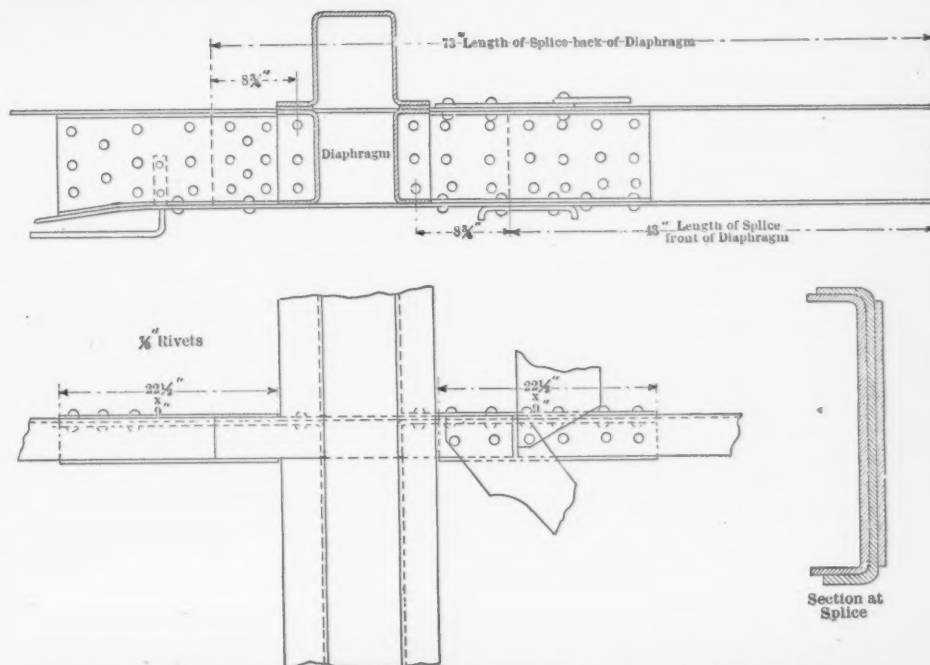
METHOD OF SPICING CENTER SILLS BOTH IN FRONT AND BACK OF THE BOLSTER ON CLASS N-8 HOPPERS.
